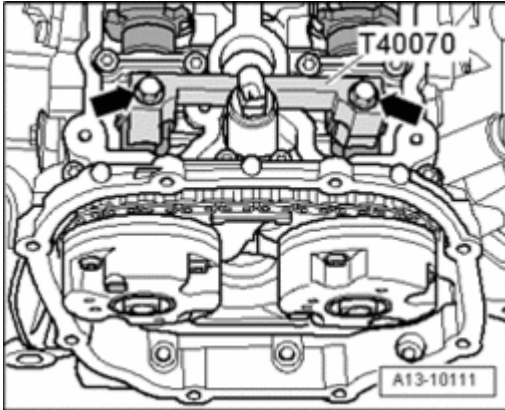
Identifying Threaded Holes In Camshafts Must Face Upward
